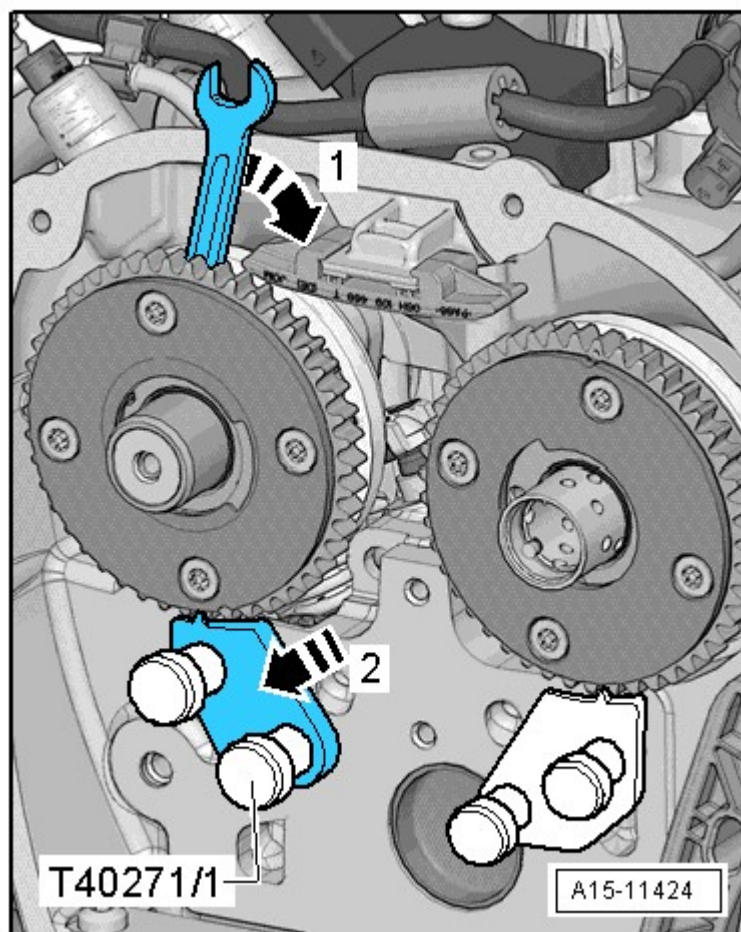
Turning Exhaust Camshaft With Wrench In Direction Of Arrow
